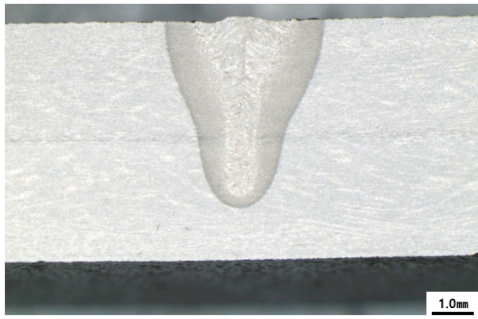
Cross-sectional view of the specimen at the welding speed of 1.5 m/min (Case 2).
